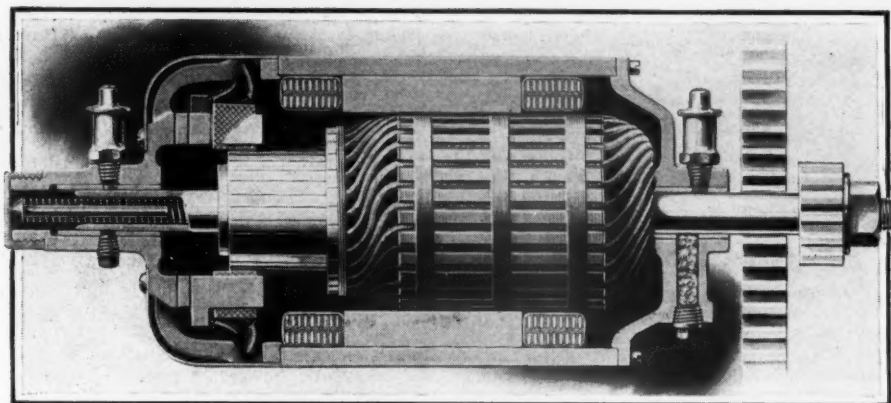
SECTIONAL VIEW OF RUSHMORE ELECTRIC STARTER
